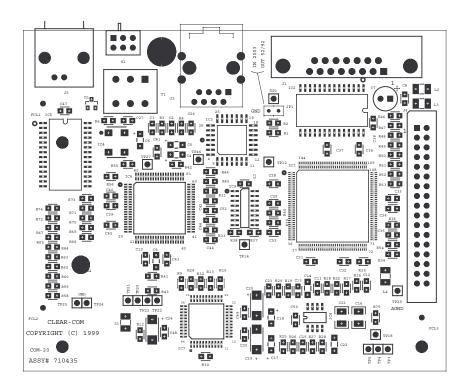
Assembly Drawing—COM-20 Communication PCB Rev. C
